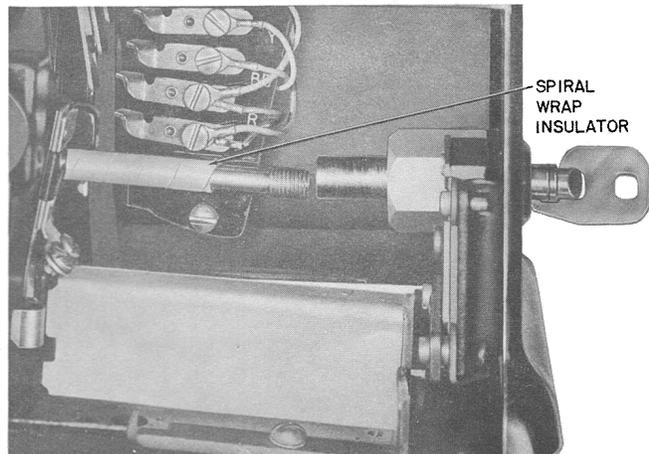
Cutaway Section of Upper Housing Showing Mating of Bolt Fastener and KS-19277 Lock With Housing Placed on Coin Collector
